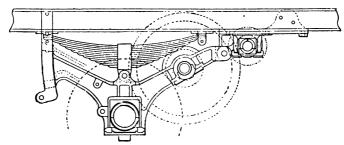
The Yorkshire heavy-freight steam vehicles. View of shaft and axle bracket.
